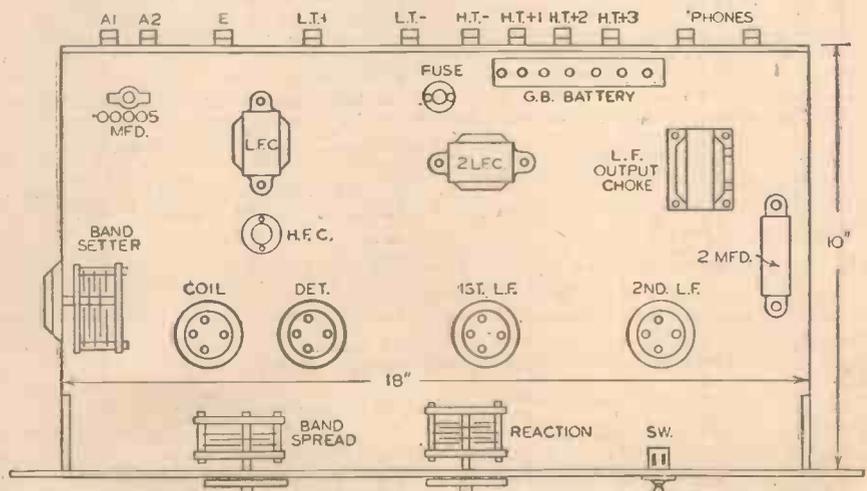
Layout of components for the three-valve S.W. receiver.
